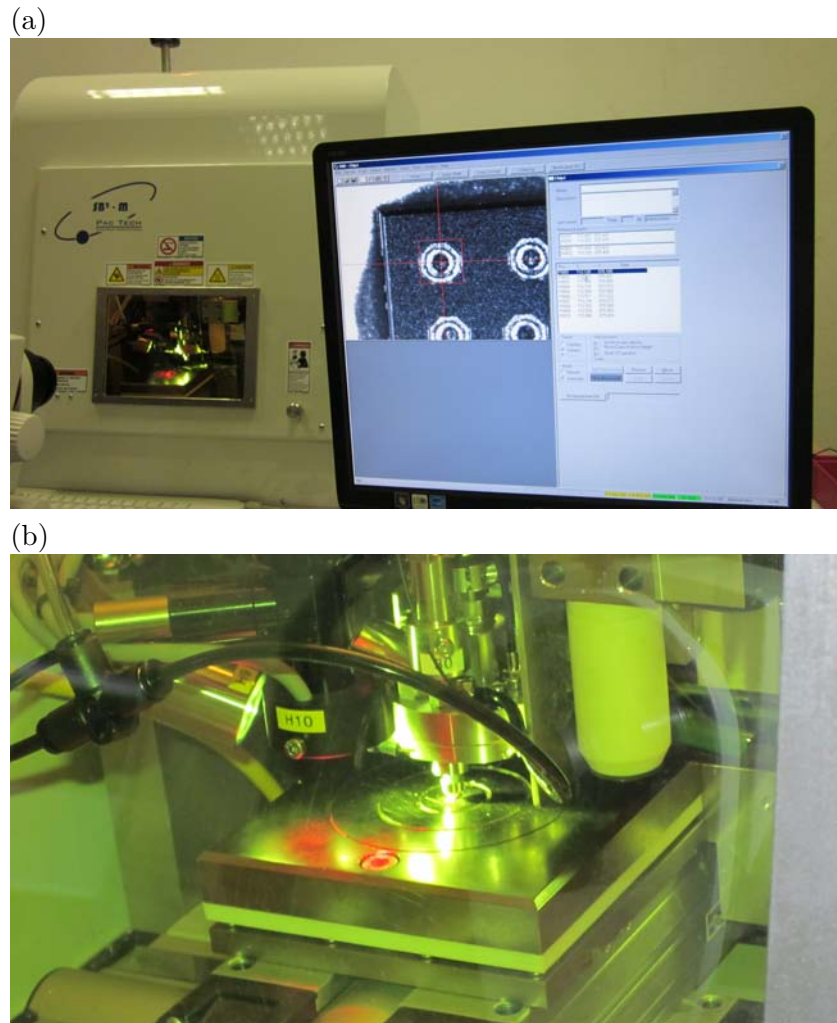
(a) Overview of SB²-M-Jet Solder Jetting assembly. The PC screen shows positioning of the selected ball bonds (top view) to be jetted (b) Close-up of the laser jetting system when operating.
